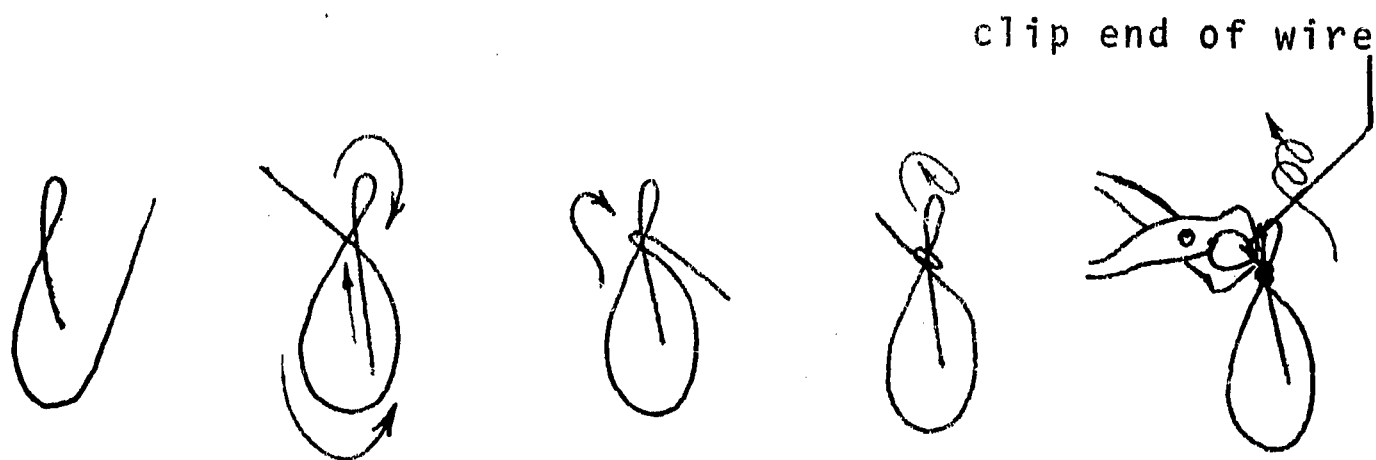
Illustrates a step-by-step method of making the wire loops which are to be placed in the sinker mold prior to pouring lead. Loops of varying sizes will have to be manufactured, depending on the size of the lead sinker.
